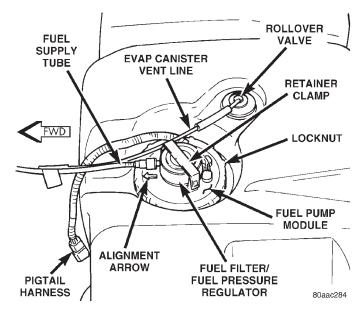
Top View of Fuel Tank and Fuel Pump Module
